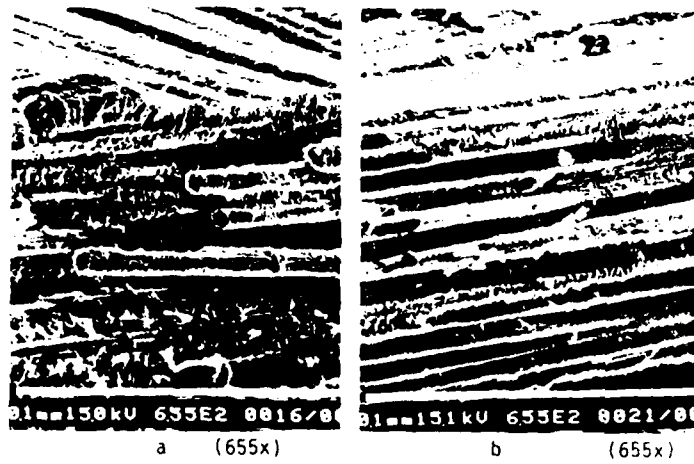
Fracture surfaces of 914C-TS-5 specimens
